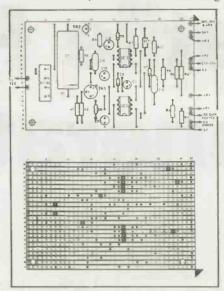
Circuit board component layout and details of breaks to be made in the underside copper tracks.
